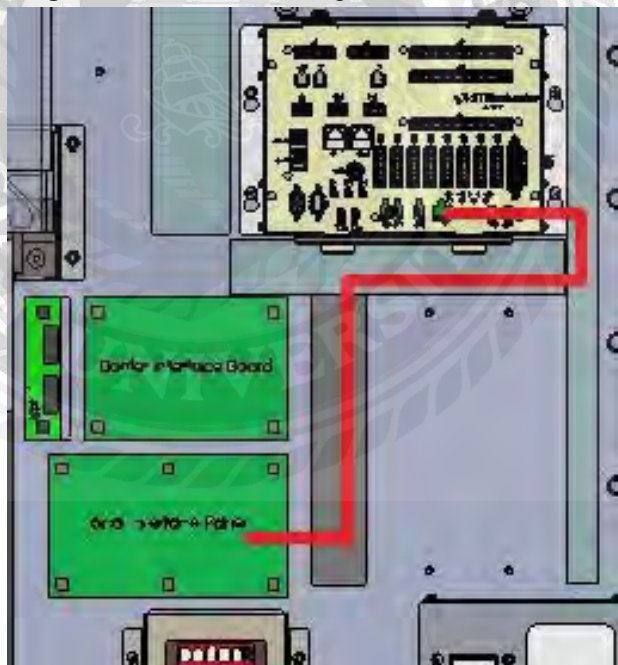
Cable Routing for STE 9812-0522 REV00
